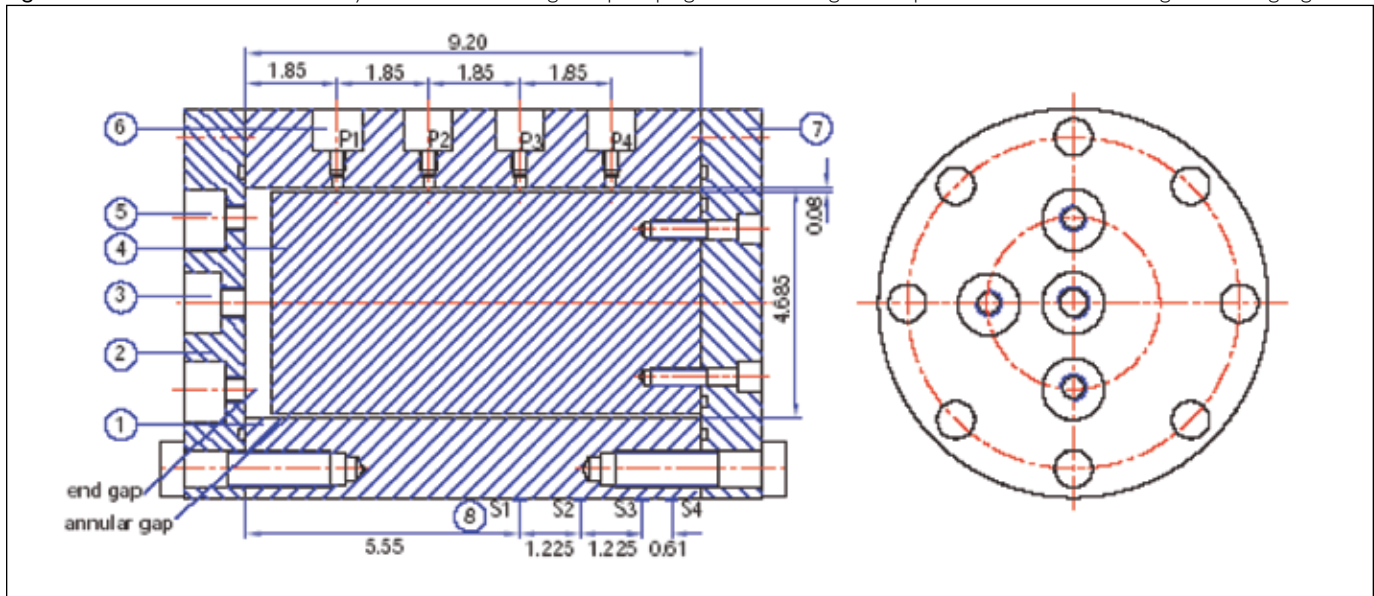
Thick-walled fixture assembly. 1-thick tube, 2-flange, 3-spark plug, 4-solid bar, 5-gas fill, 6-pressure transducer; 7-flange, 8-strain gauges
